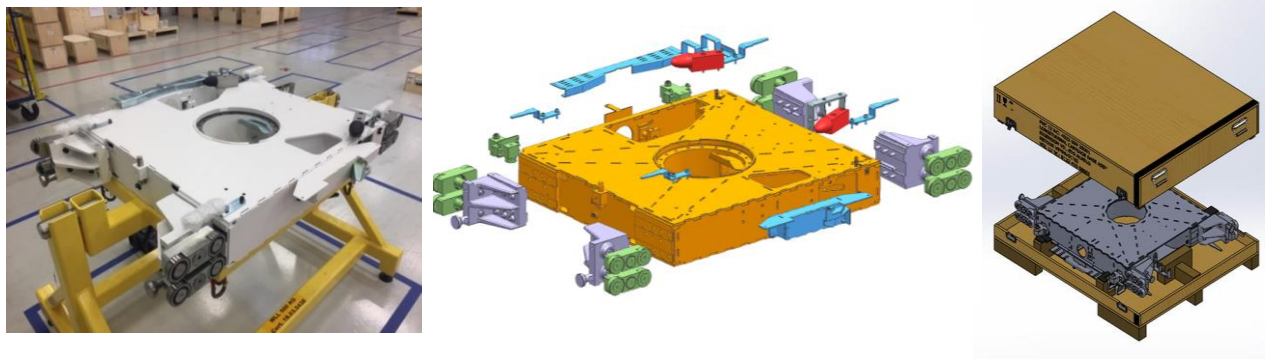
LC: Picture (Left), Exploded View (Middle), On Dedicated Pallet (Right)
